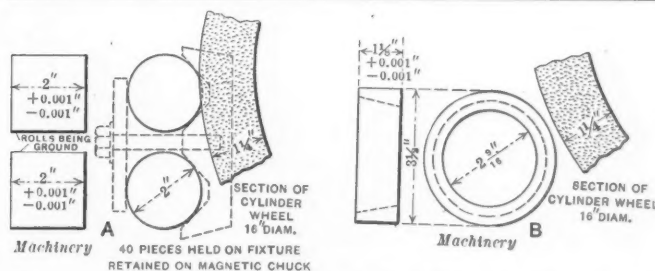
Examples of Roller Bearing Rolls and Race Ring Grinding
